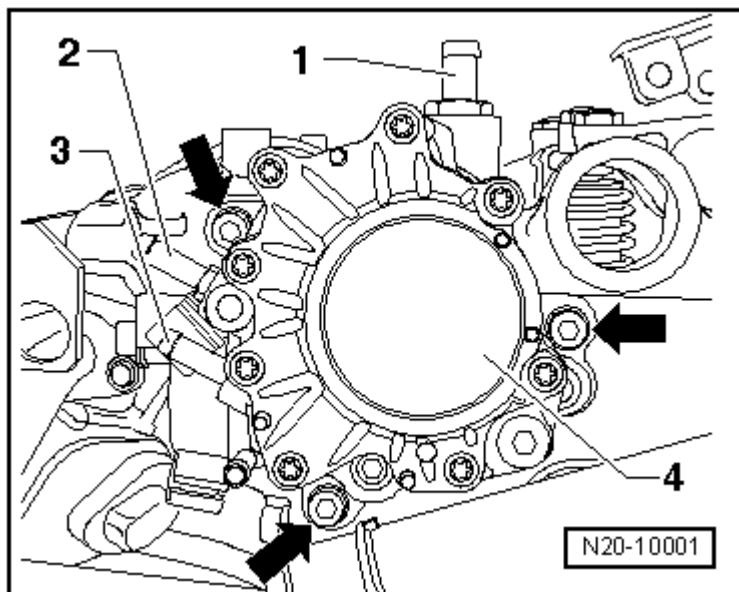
Identifying Vacuum Hose -1- And Vacuum Pump -4-
